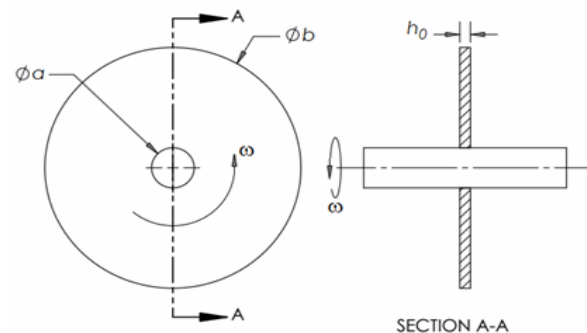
Rotating disk mounted on a rigid shaft: front and sectional side view
